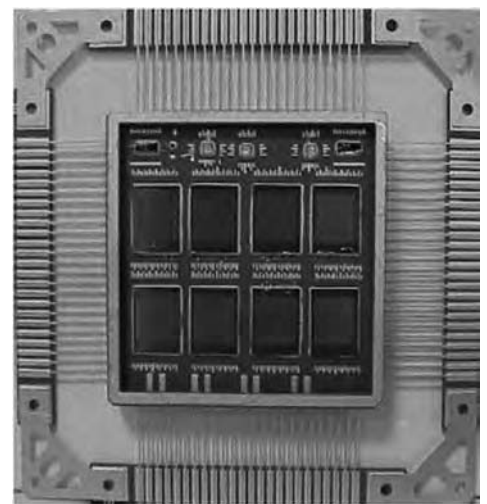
Solid-state microelectronic devices, beginning at the silicon chip level, involve assembly, including by chemical (e.g., deposition and reaction), welding (e.g., die bonding and soldering), and mechanical (e.g., pressure contact) means. Here an assembled electrically erasable programmable read-only memory complementary metal oxide semiconductor device is shown.
